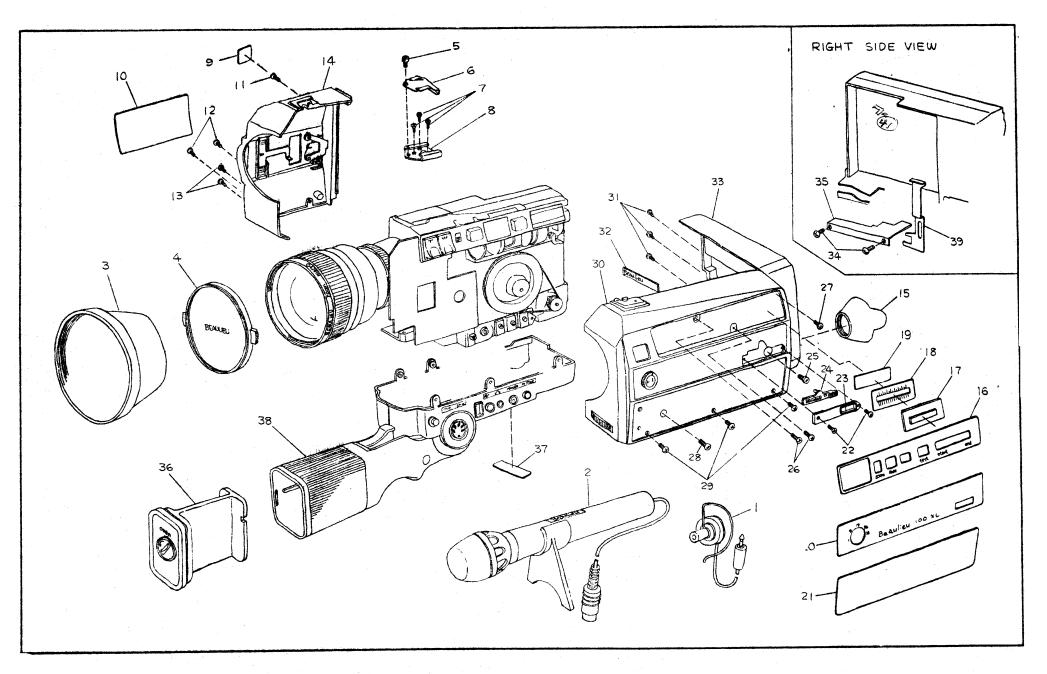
Camera Body Assembly (1) - CAMERA COMPLETE -
